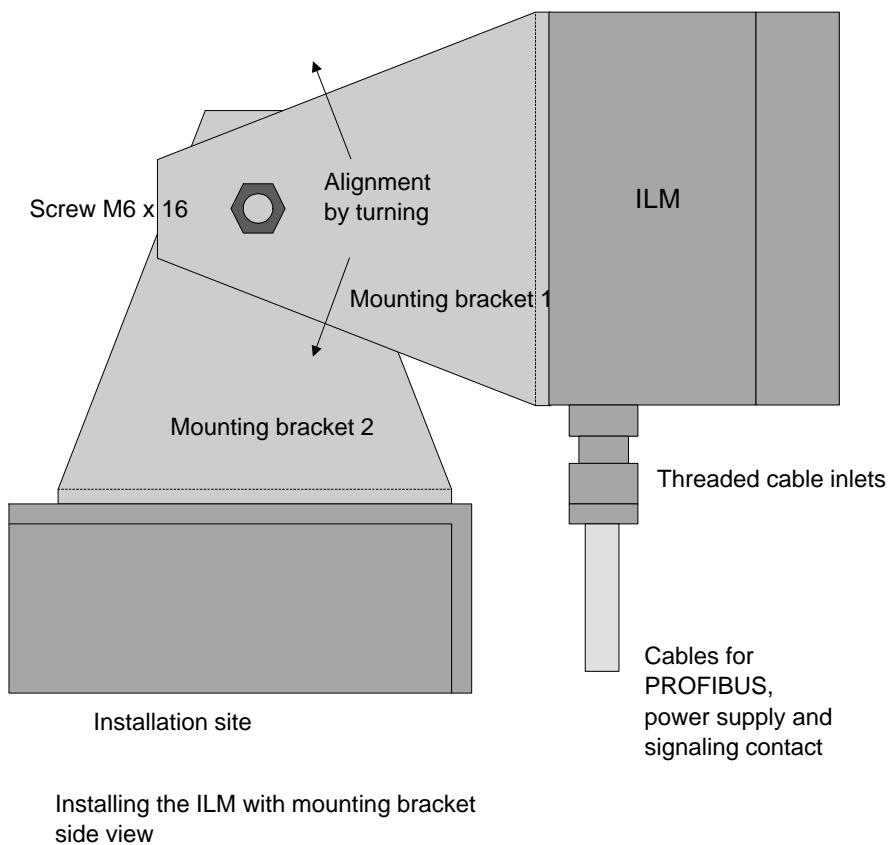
Side View of a PROFIBUS ILM Installed With Mounting Brackets
